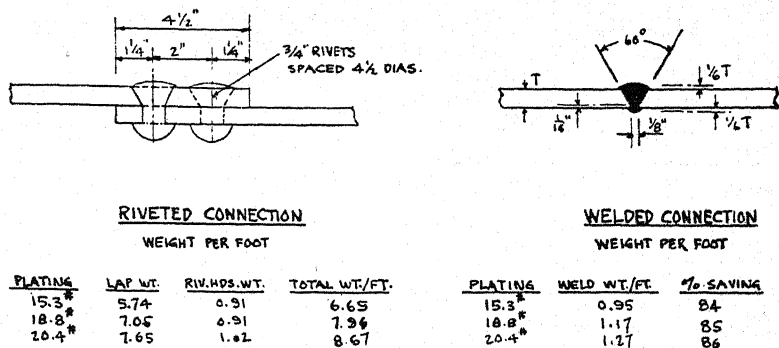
Comparative weight—riveted and welded deck and shell plating seams.
